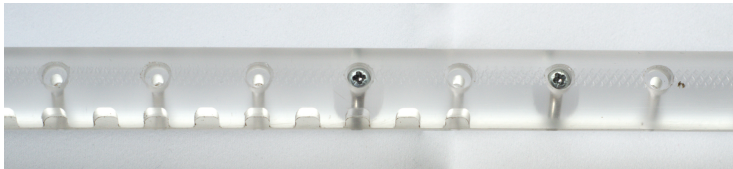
Close-up of the Lexan halves with milled sensor slots and screw holes. When assembling the probe, they will encompass the PCB with sensors and thermal paste in the slots.
